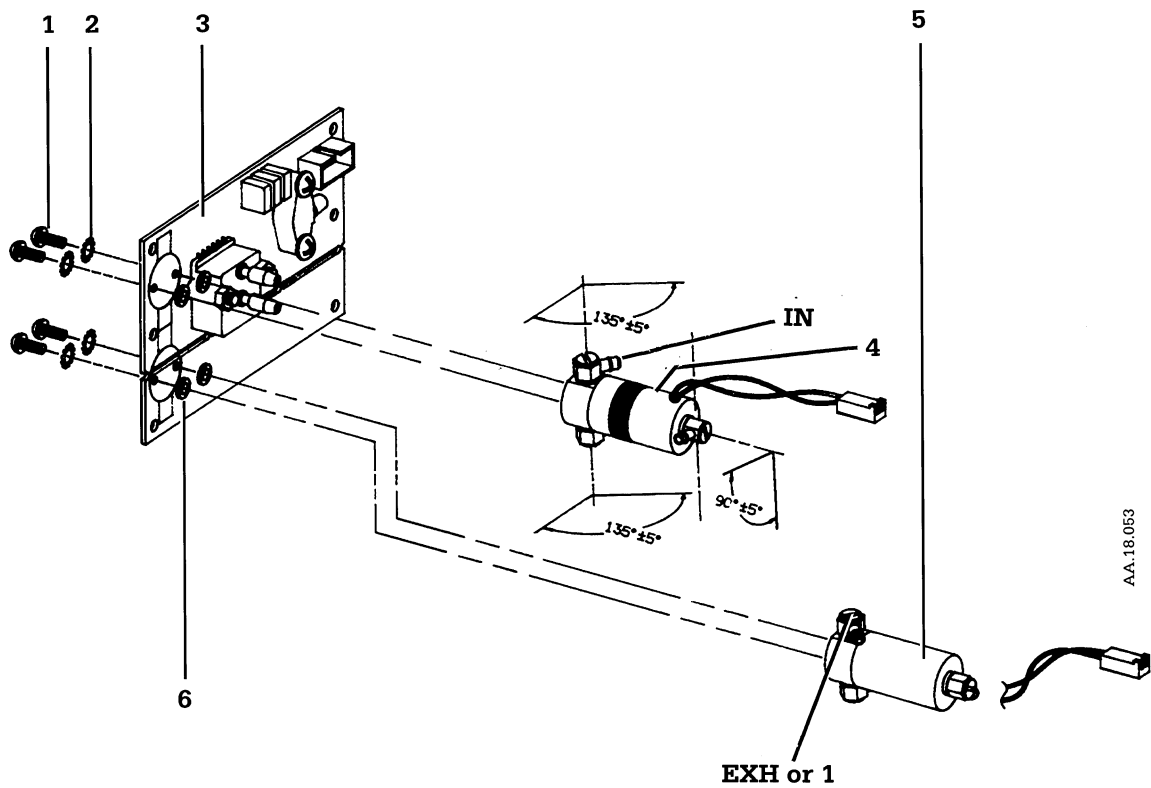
Solenoids and Universal Pressure Transducer Board
